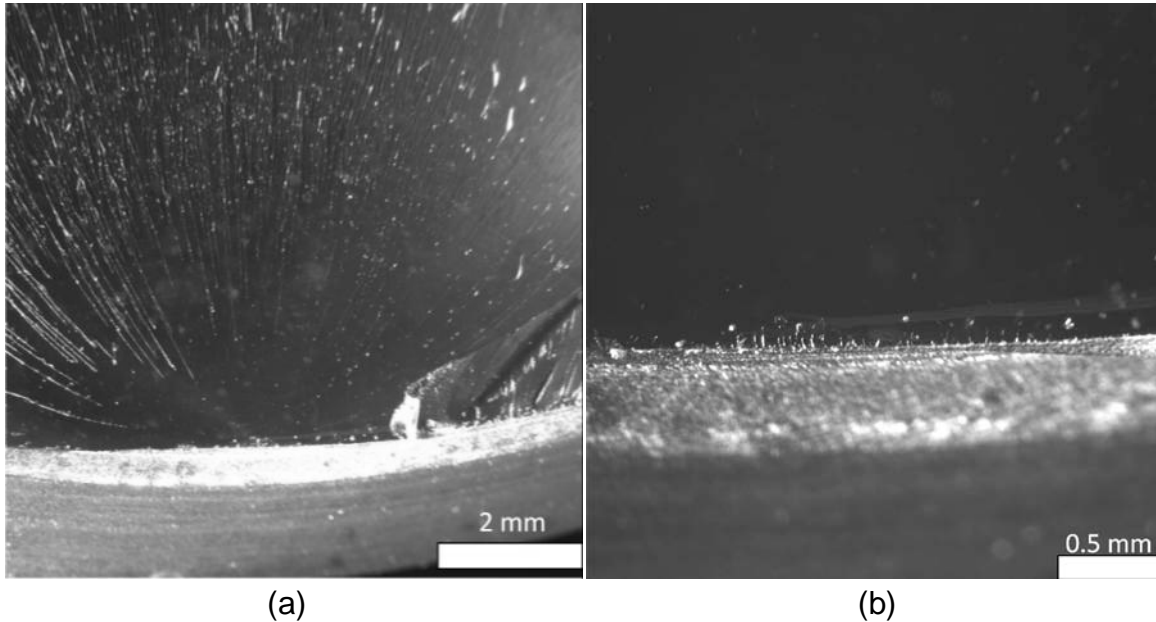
Images showing the fracture surface of MFG-2.
